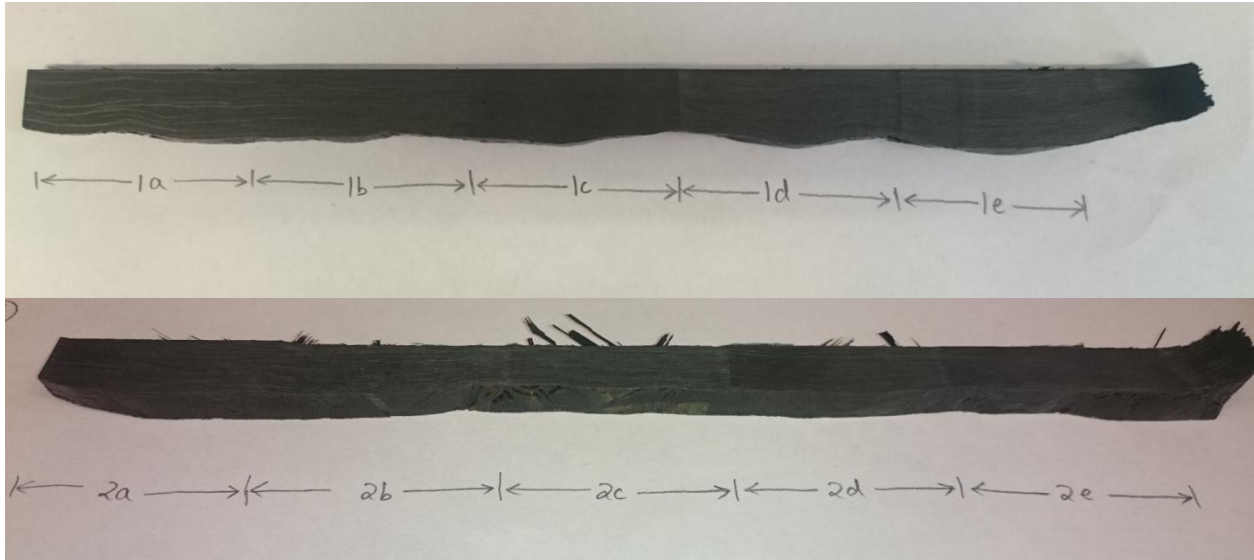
HexMC composite work piece after machining for Surface roughness tests
